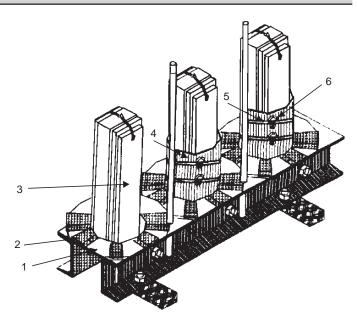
Mounting the coil end and yoke insulation on transformers upto 1000 kVA at 11 kV
